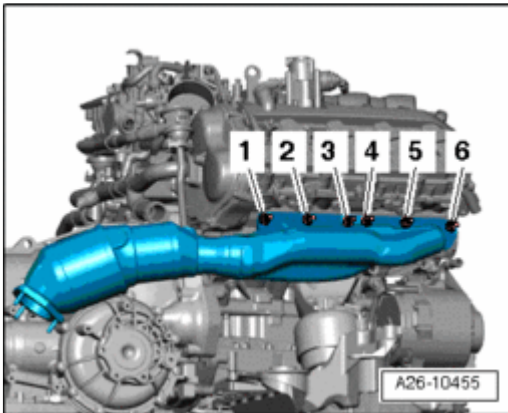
Removing Nuts And Right Exhaust Manifold With Catalytic Converter
